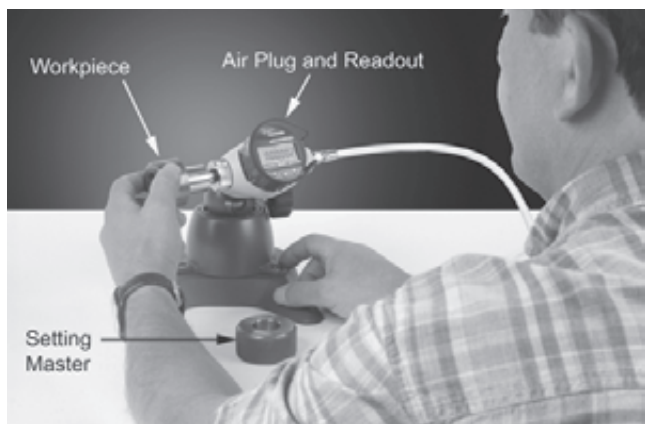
Air plug gage (Courtesy Mahr Federal Inc.).
